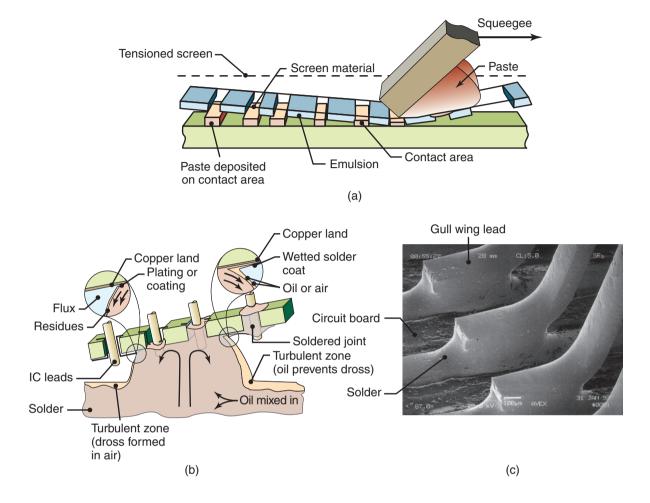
(a) Screening solder paste onto a printed circuit board in reflow soldering. (b) Schematic illustration of the wave-soldering process. (c) SEM image of a wave-soldered joint on surface-mount device. *Source:* (a) After V. Solberg.
